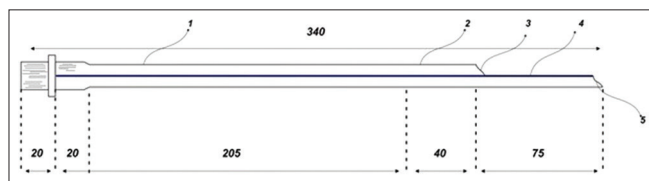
Downpipe endotracheal tube; (1) Body of tube outside mouth (2) Body of tube inside mouth. (3) Bevel of the tube (4) Body of the tube placed inside the trachea. (5) Bevel of end of the tube. Dimensions are provided in mm
